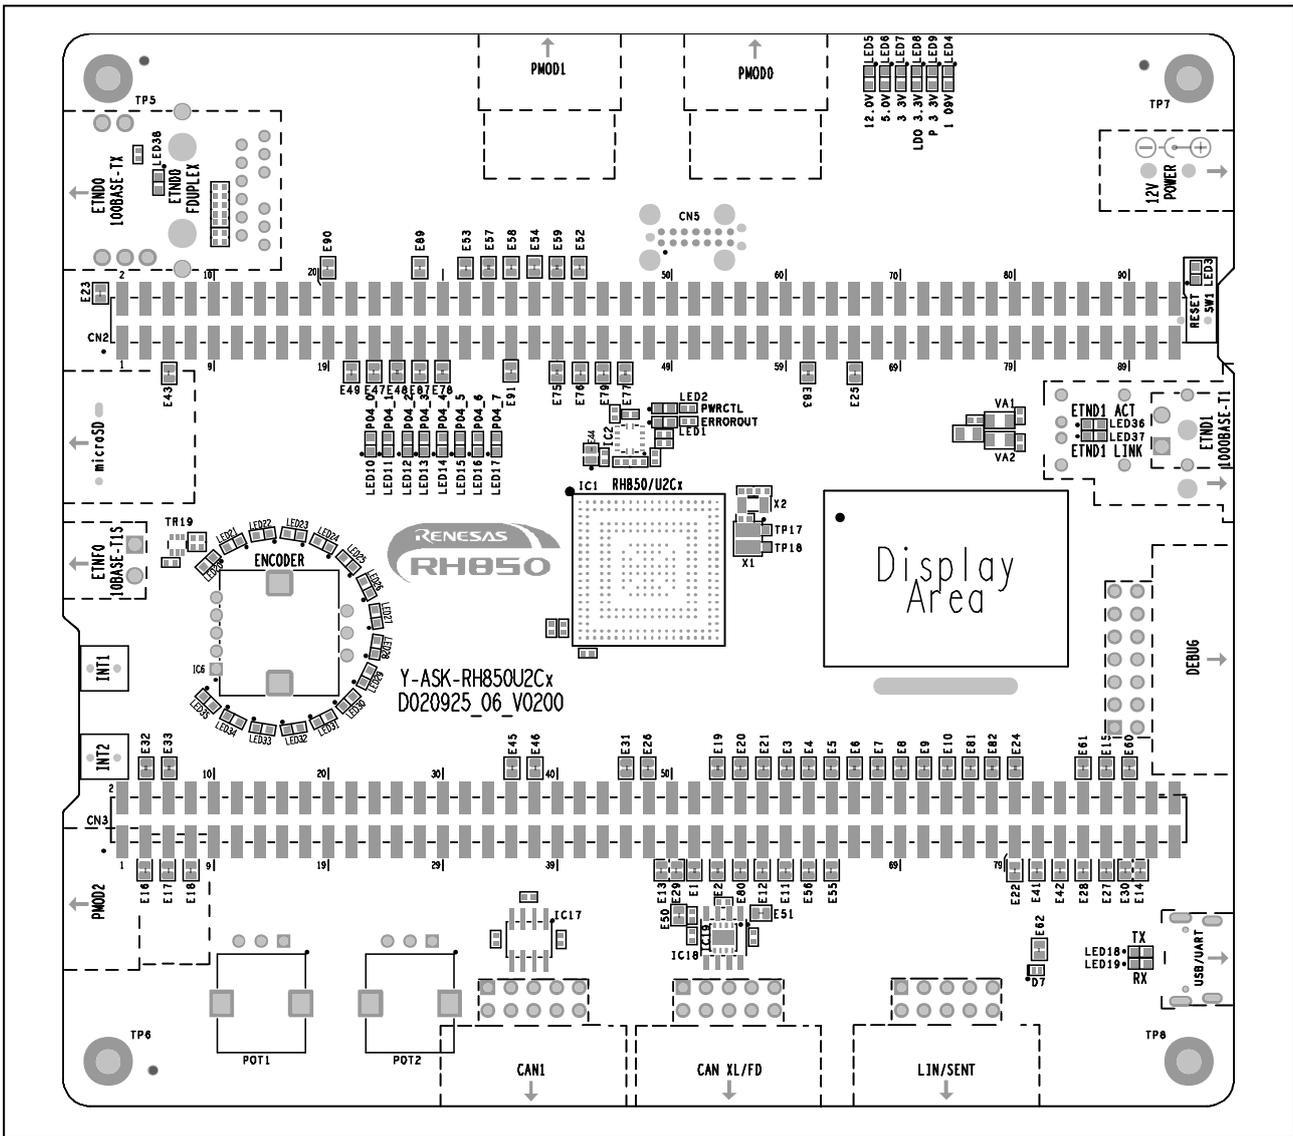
Starter kit board top view for board version D020925_06_V0200
